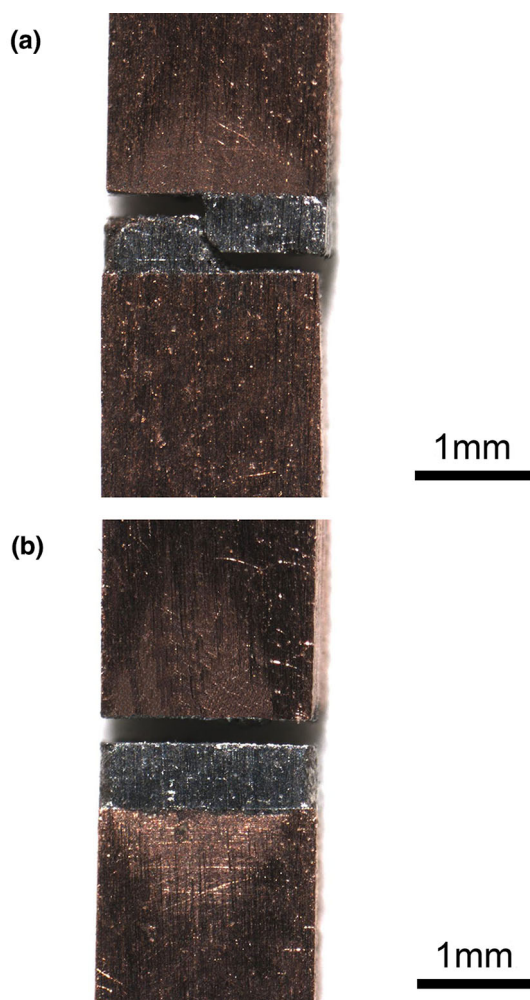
Fracture modes of solder joints with different compositions: (a) 38Sn-50Bi-12In, (b) 53Sn-35Bi-12In.
